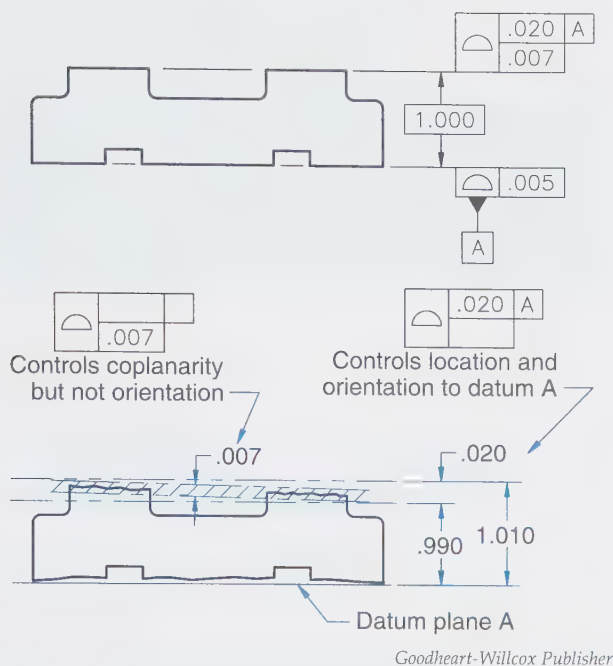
Composite profile tolerances permit large tolerances for less critical characteristics, and close control of the characteristics that need smaller tolerances.
